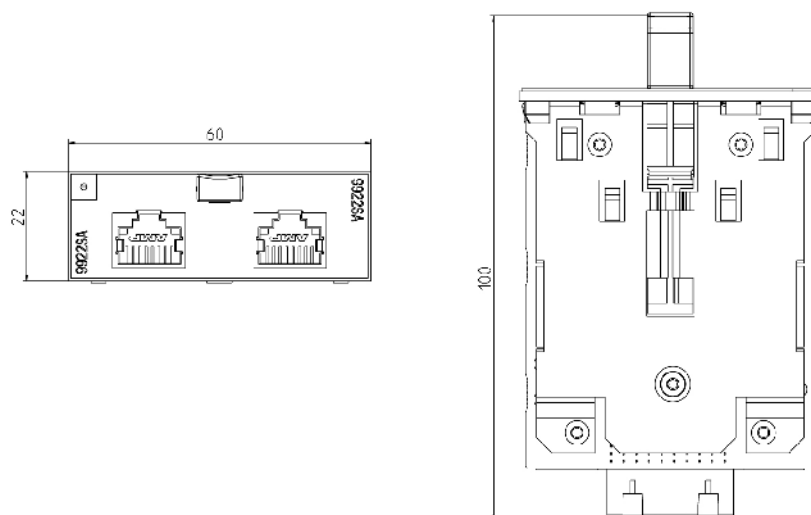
MM900 dimension drawing 2: Electrical RJ-45 ports without securing collar
